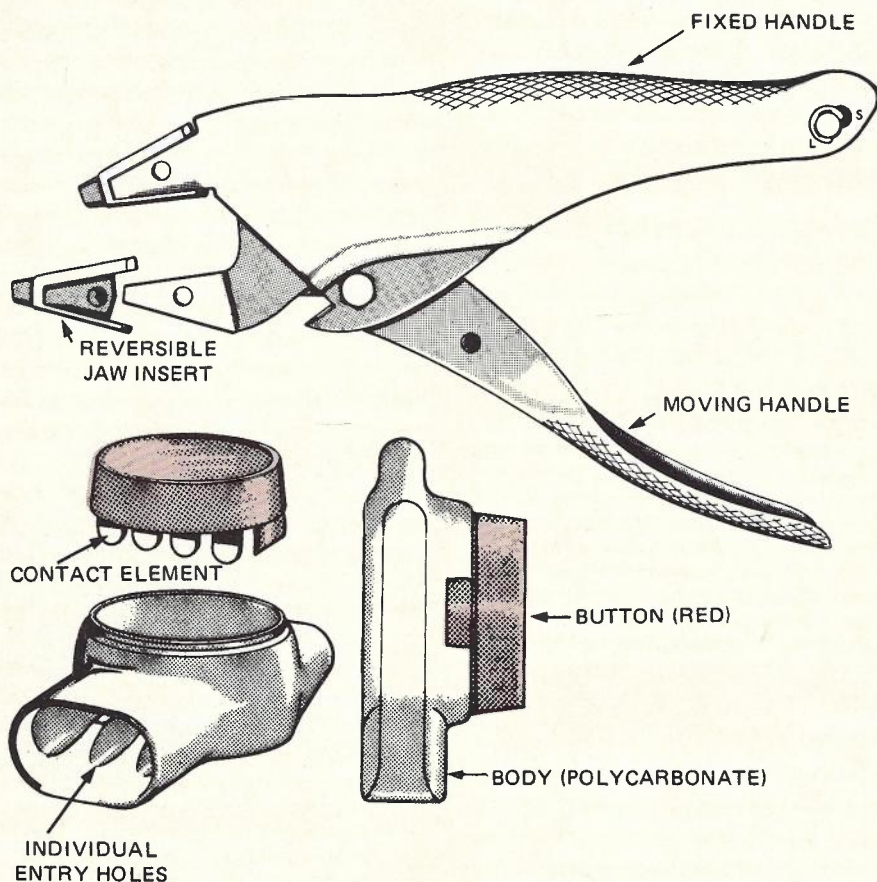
"Scotchlok" Type UR Connector and Hand Tool.
